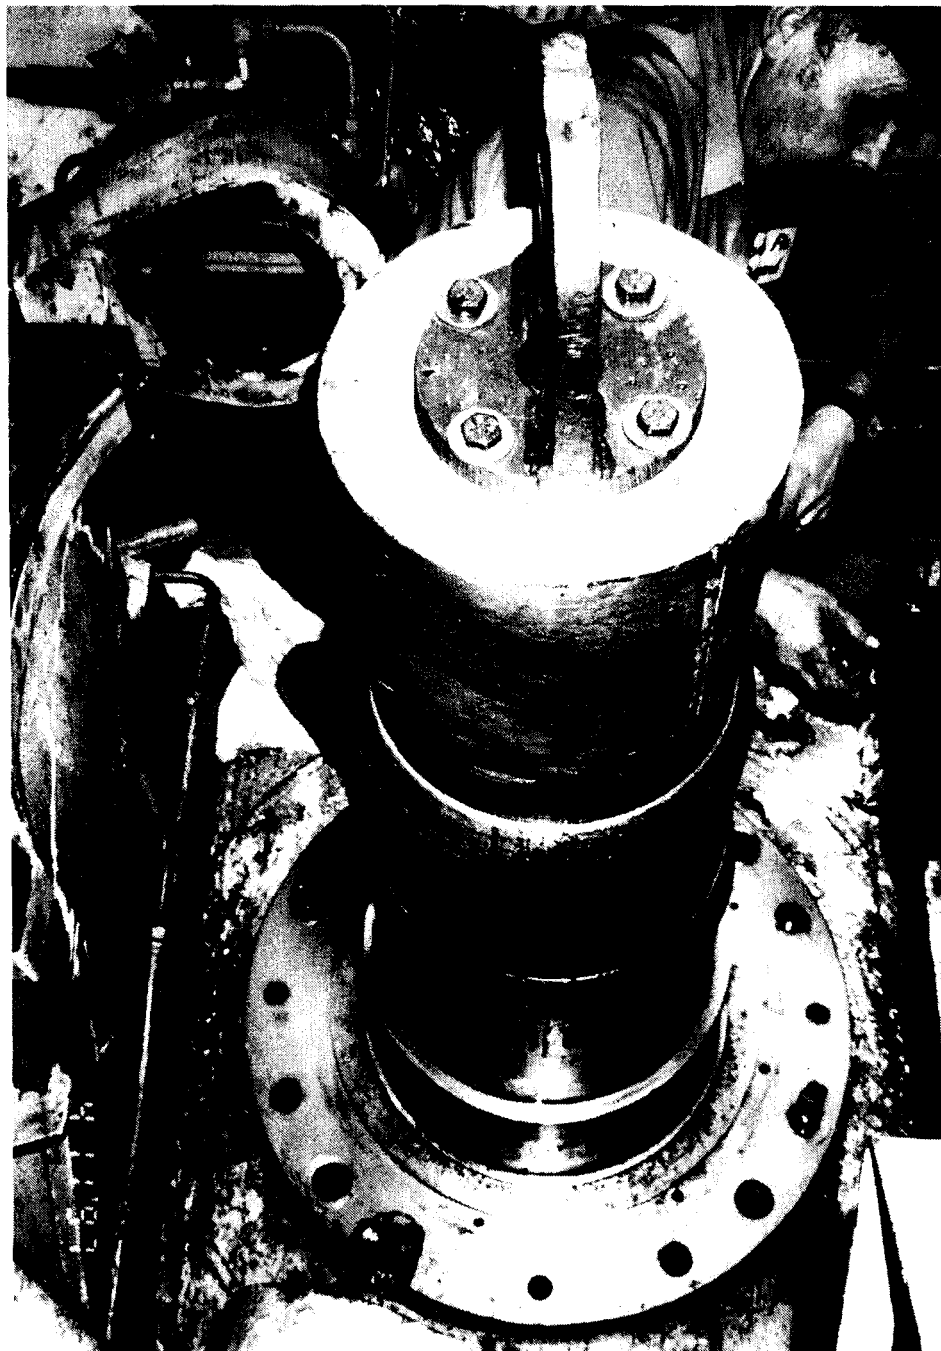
NEW FINSHAFT IN POSITION INSIDE SHIP, WITH COFFERDAM REMOVED AND SHAFT HELD IN PLACE BY EXTERNAL SUPPORT RIGGING
